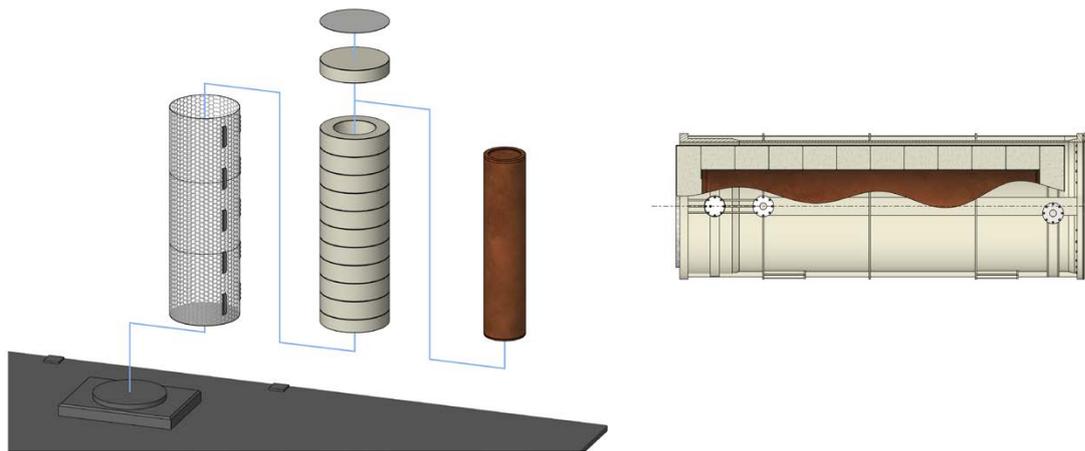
Basic outfling of the Heated Supercontainer test, left figure illustrating the supercontainer assembly and the right figure illustrating the supercontainer placed inside a sealed transport tube in horizontal position.
